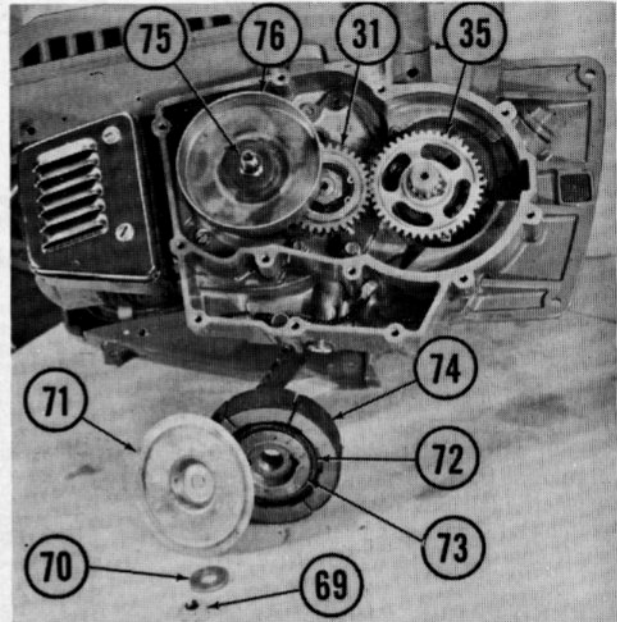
View of transmission with cover off and clutch assembly removed.
